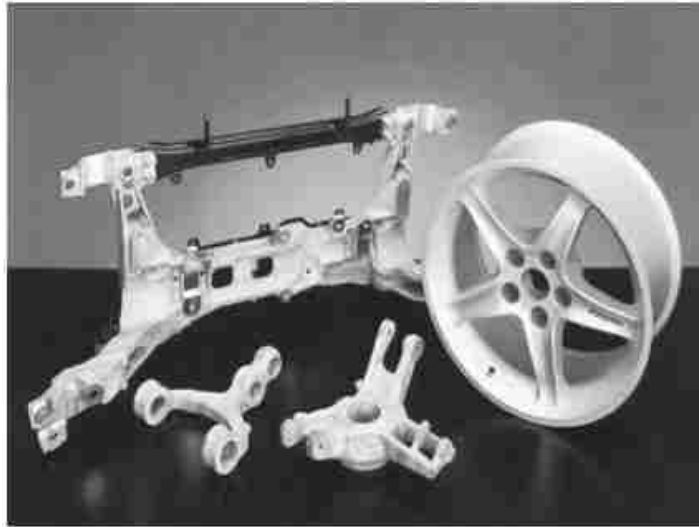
Automotive parts produced by the squeeze casting process. Courtesy of UBE Industries [11].
